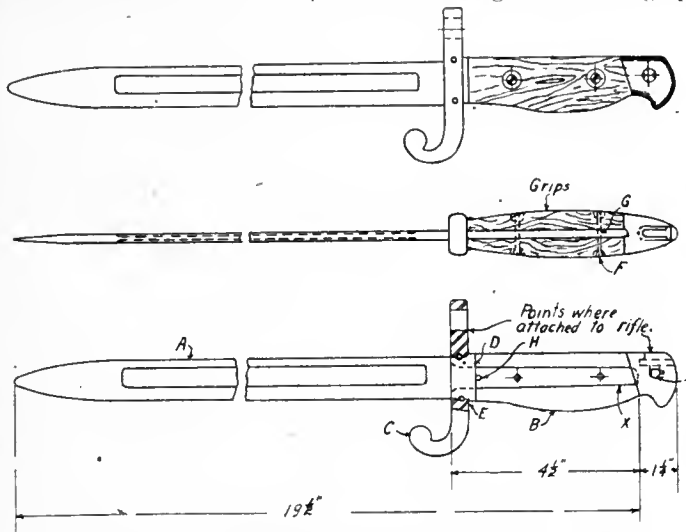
DETAILS OF BAYONET CONSTRUCTION.
